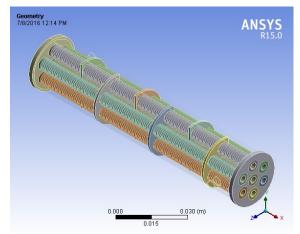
Internal view of rectangular finned shell and tube heat exchanger
